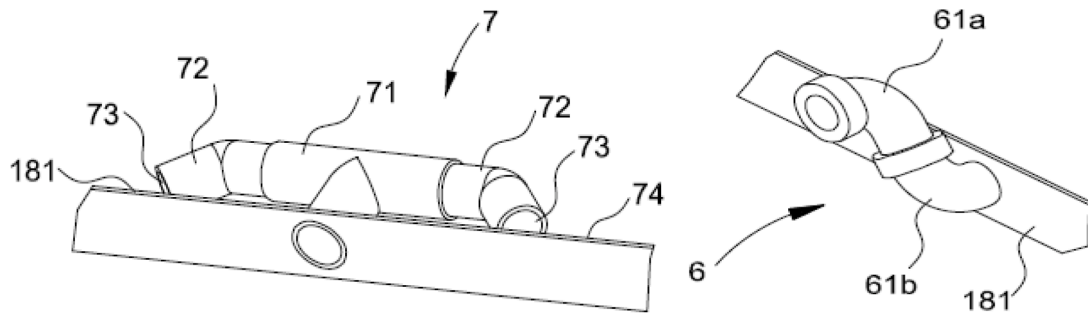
Details on constructing the stream spreader and pipe adaptor forming part of the cooling system.
